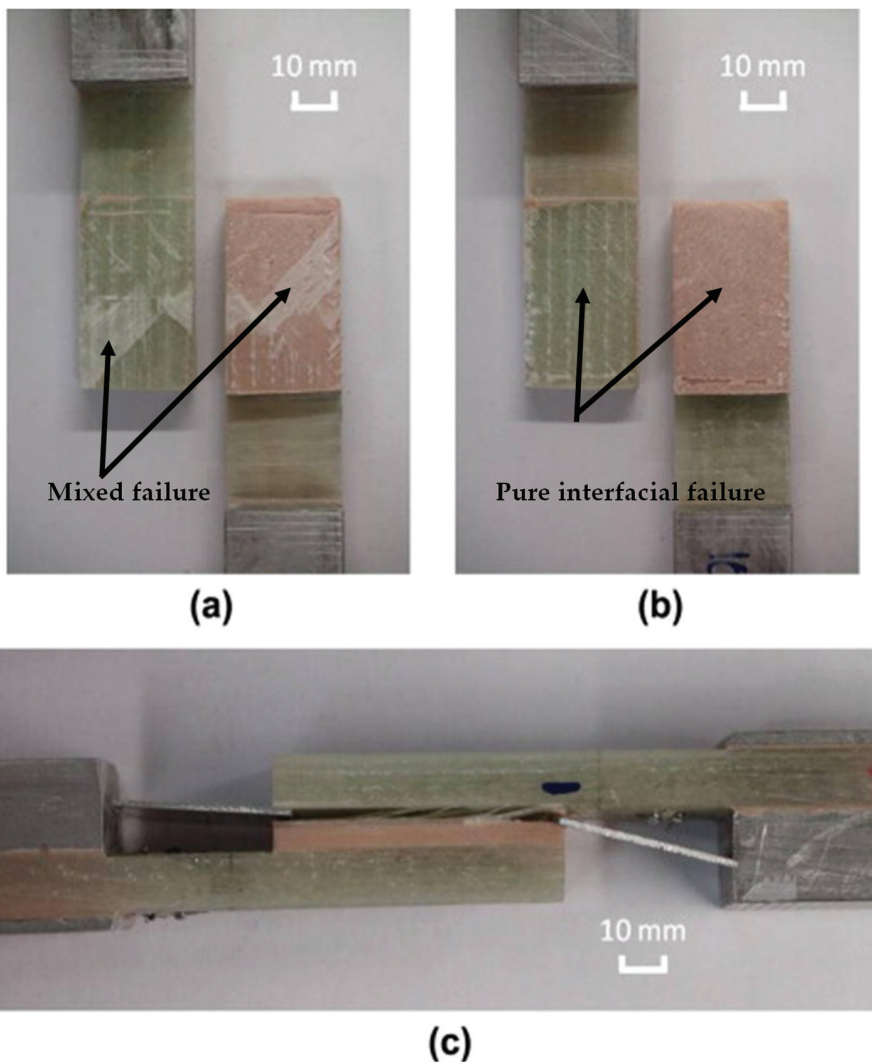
Different fracture surfaces during fatigue testing: (a,b) disassembled joint and (c) assembled joint with fracture. Reprinted with permission from Ref. [50]. Copyright 2024 Elsevier.
